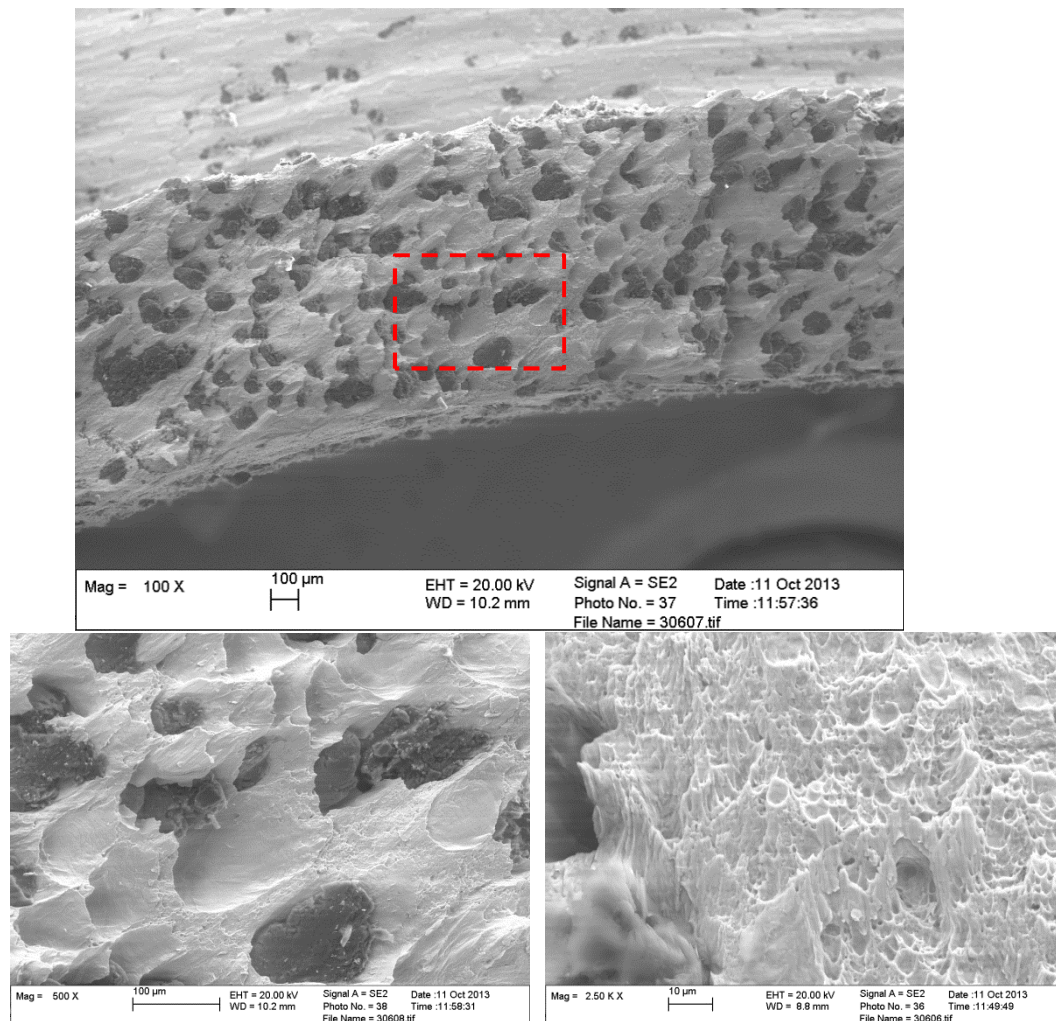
Fracture surface taken from Specimen 17250 tested in uniaxial tension showing an overall picture in (a) and close-ups in (b) and (c). The scale in each picture is indicated by the scale bar.
